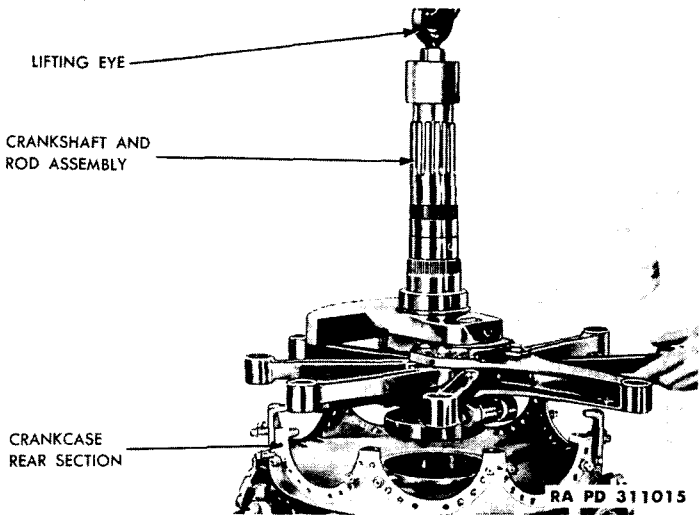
Removing Crankshaft, Using Lifting Eye 5A2265
